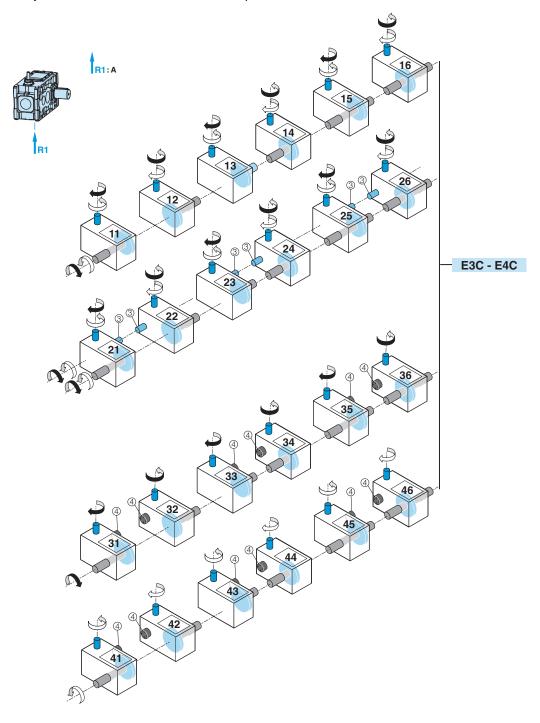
Shaft layouts and directions of rotation for bevel helical gear units
